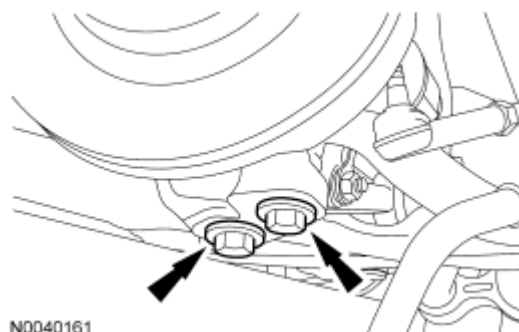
Locating Front And Rear Lower Control Arm Nuts
